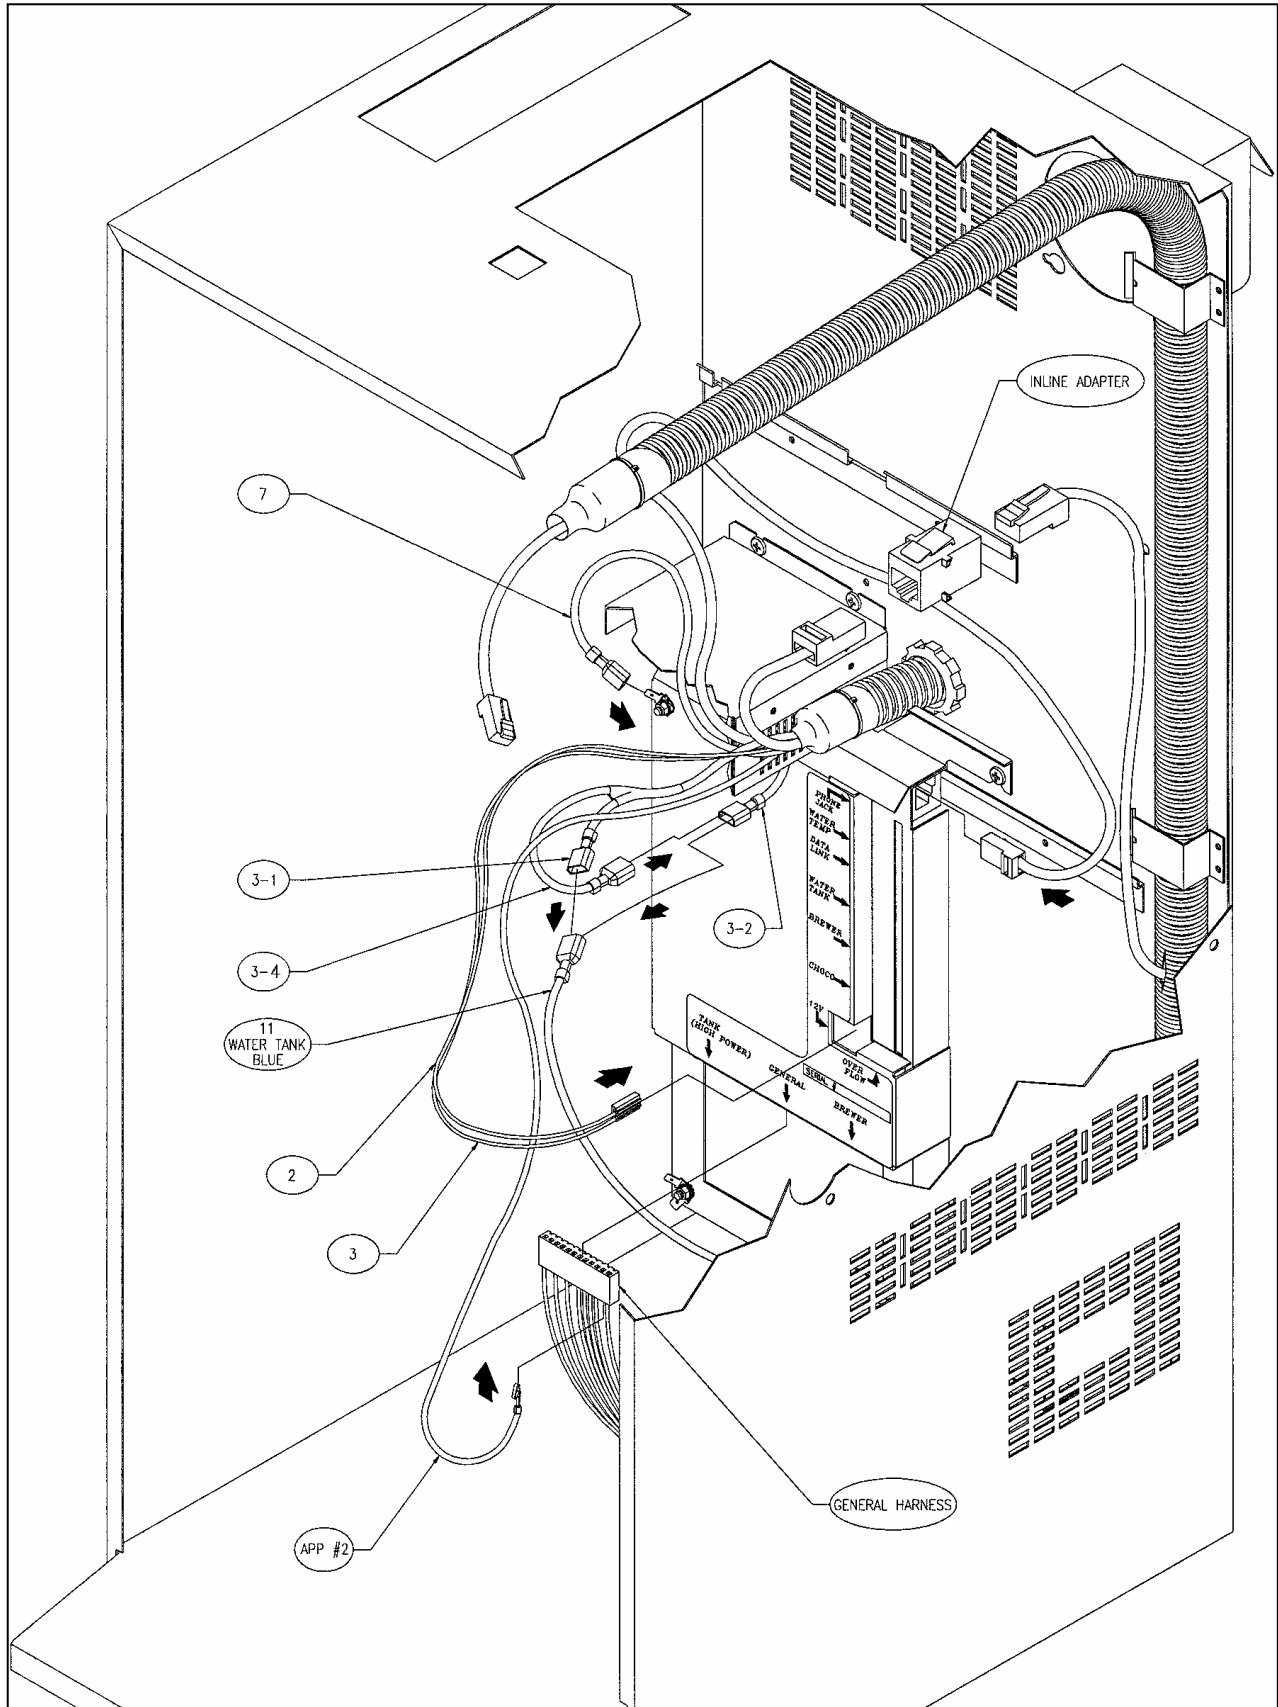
Machine Wiring for the Auxiliary Powder Product System
